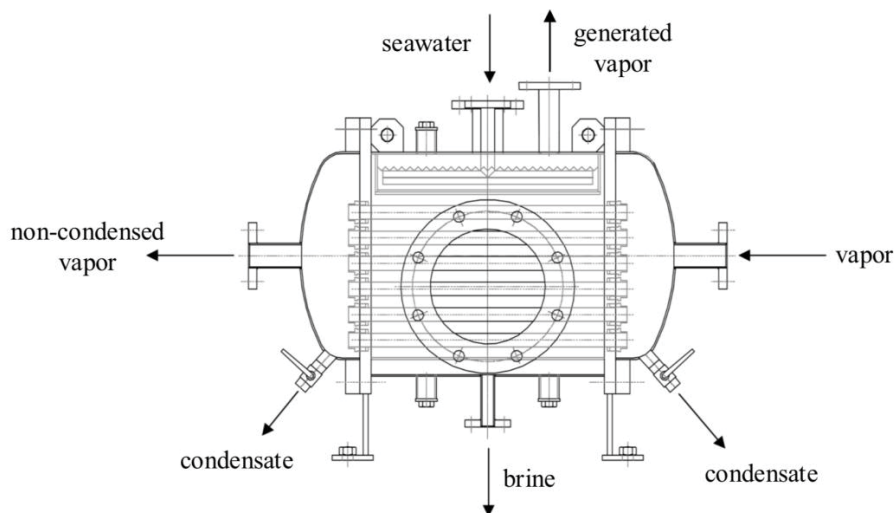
Drawing of the horizontal tube falling film evaporator [23].
